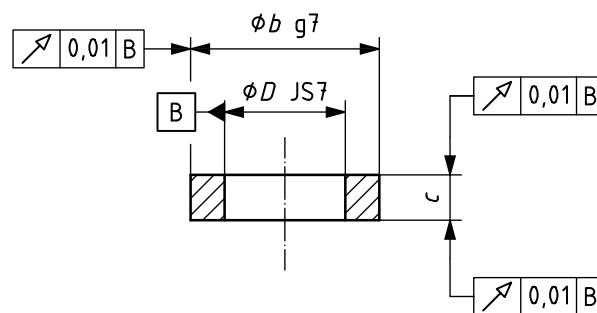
Unbalance hole dimensions for type 11 test wheels
